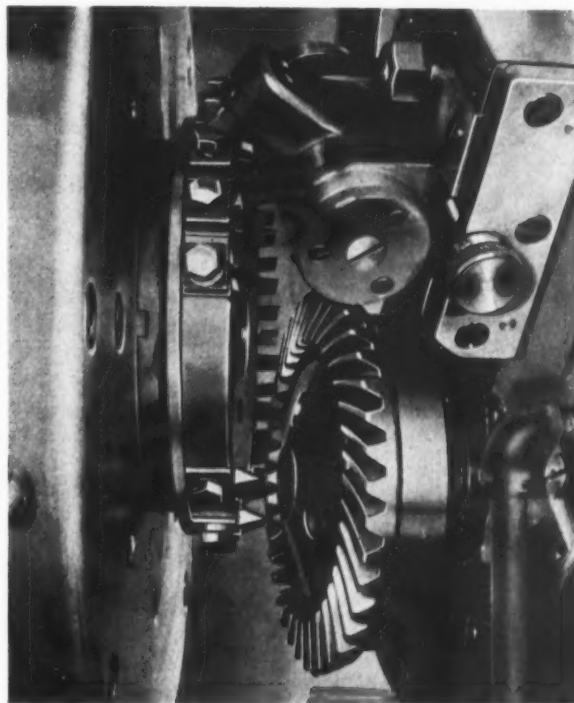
The Finishing Cutter is Made with Two Series of Inserted Blades
